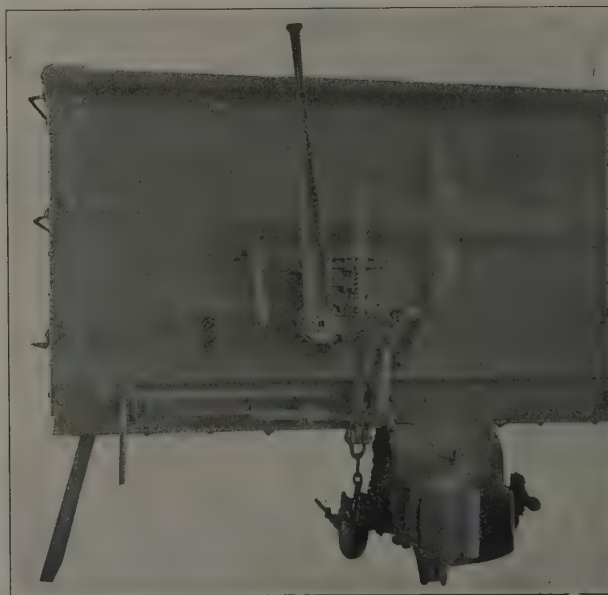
Hand Brake Shown in Fig. 1533 with Casing Removed.
